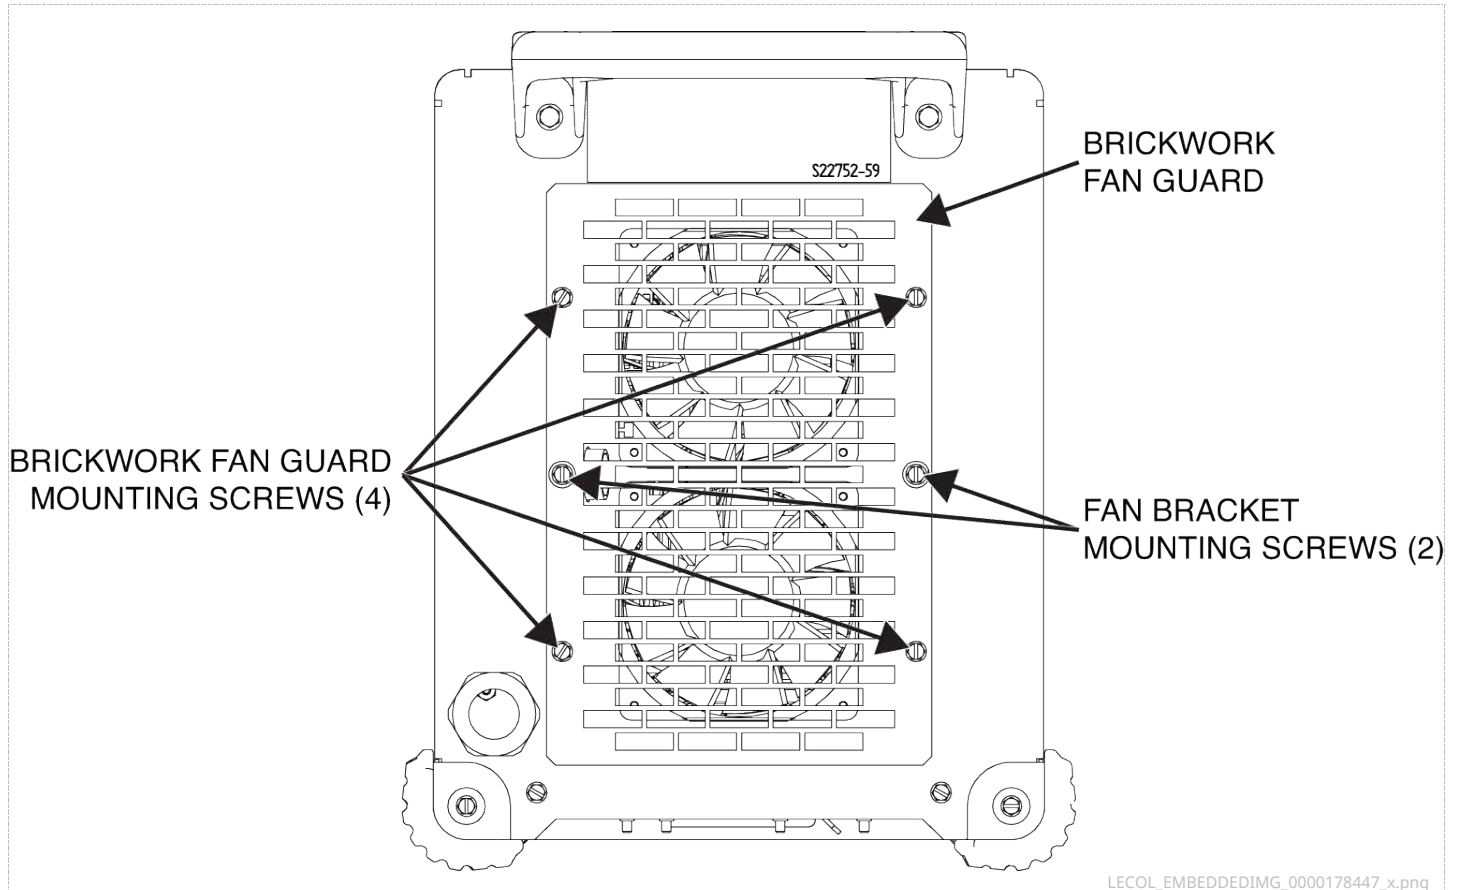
Brickwork fan guard and fan bracket mounting screw locations
